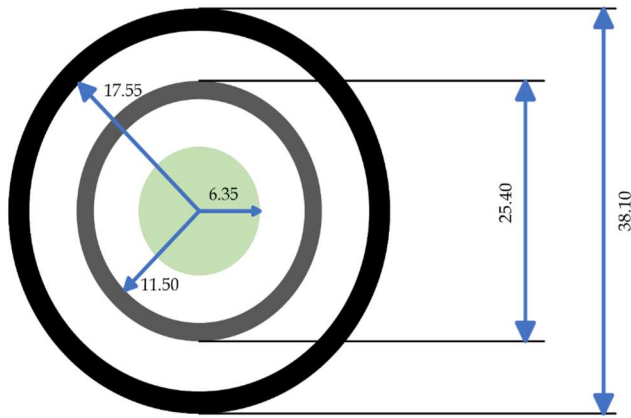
Detailed geometry of dual annulus stratified swirl combustor
